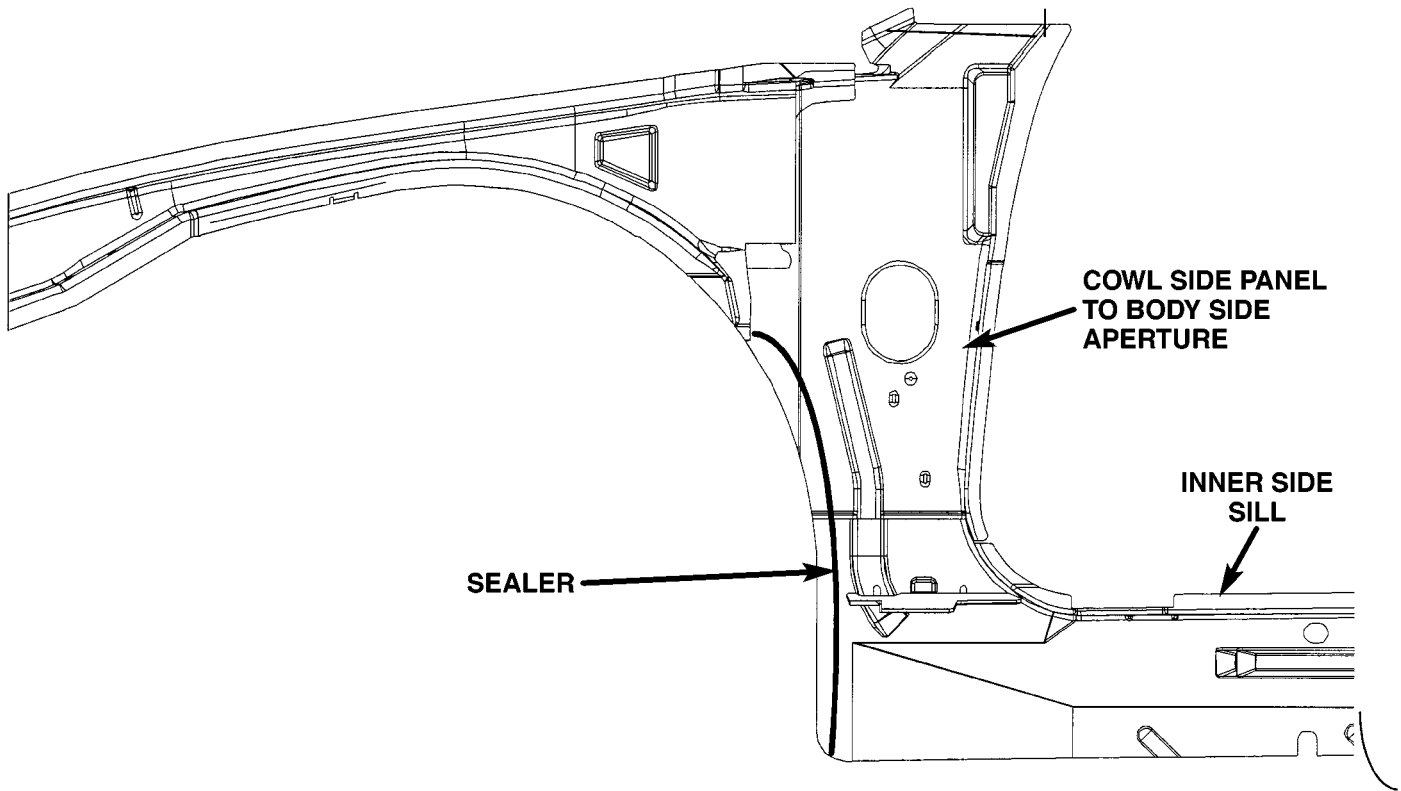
COWL SIDE PANEL, BODY SIDE APERTURE & INNER SIDE SILL
